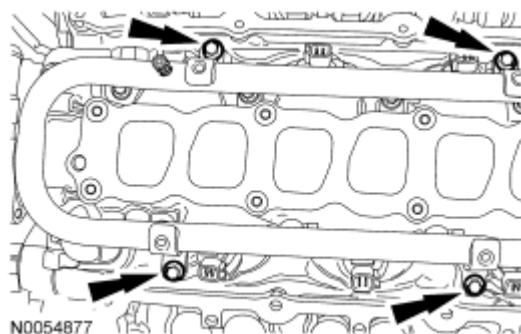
Locating Fuel Rail And Injectors & Bolts
